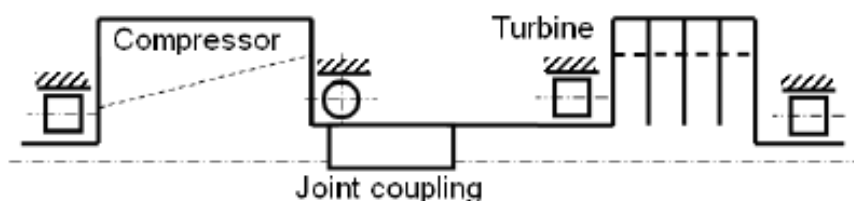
Four-support rotor with one radial-thrust bearing
